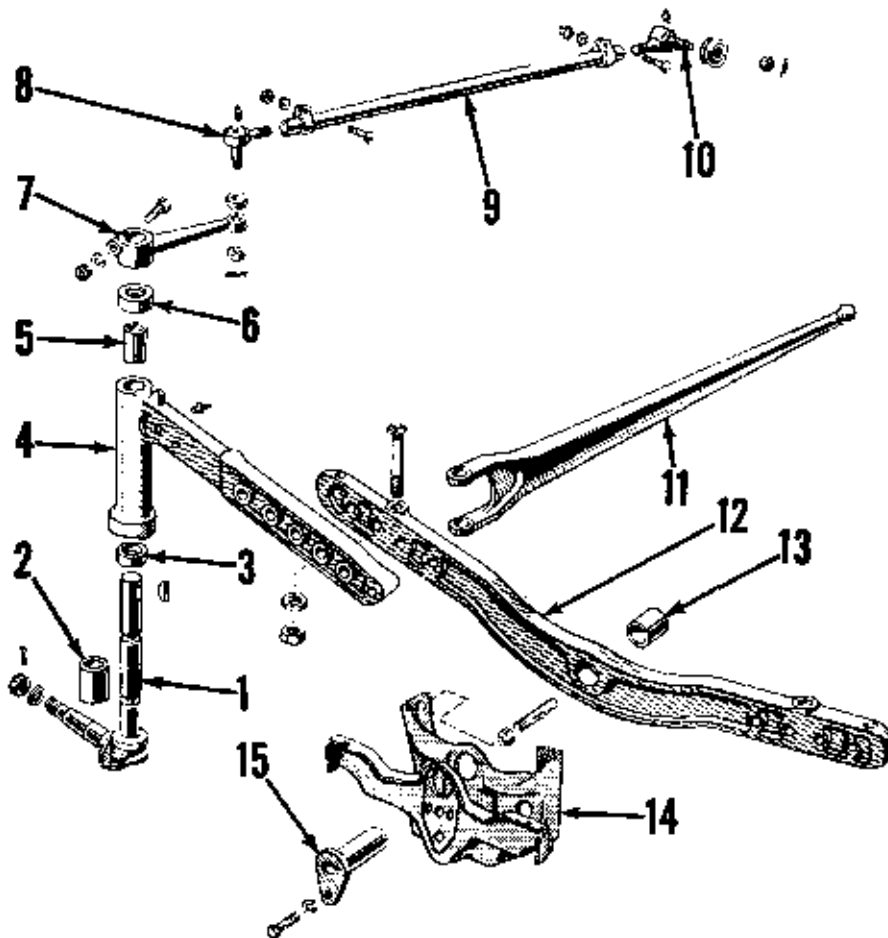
Exploded view of front axle and related parts. Original type front axle support (14) and pivot pin (15) are shown. Refer to Fig. FO2 for later style service front support and pivot pin.
